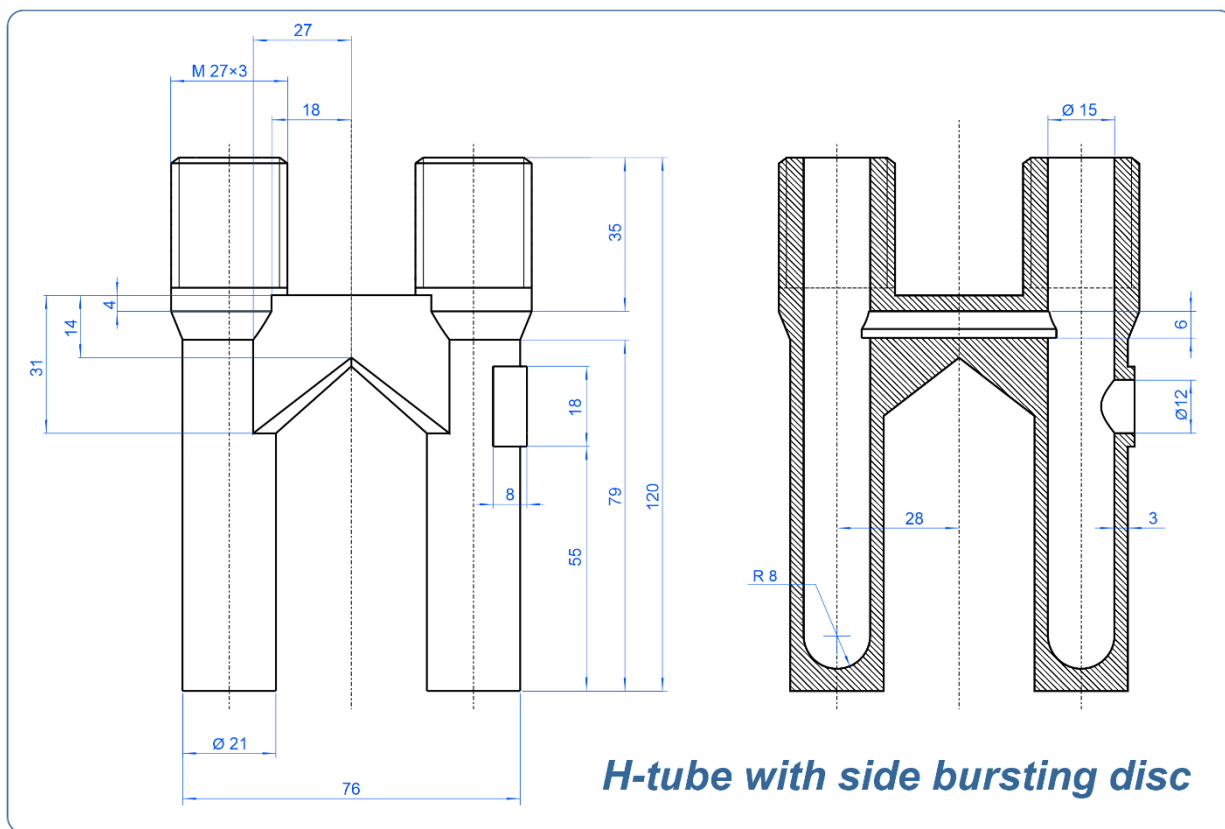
Drawing of reactor vessel H-tube type 1 with a side bursting disc.
